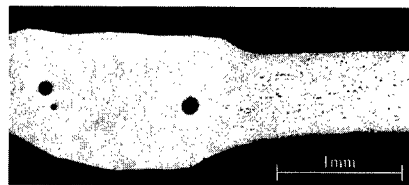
Over View of Formed Article (Longitudinal Weld Line)
